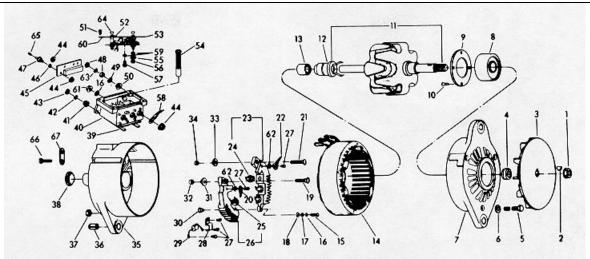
EXPLODED VIEW OF ALTERNATOR
